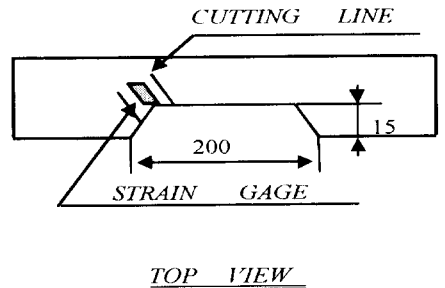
Position of Strain Gage Attachment and Dimension of Oxygen Cutting Frame
